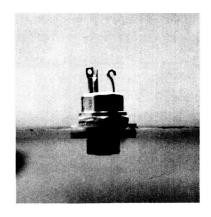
Mounting of 2N1724 transistor on anodized aluminum heat sink, using two BeO washers.
